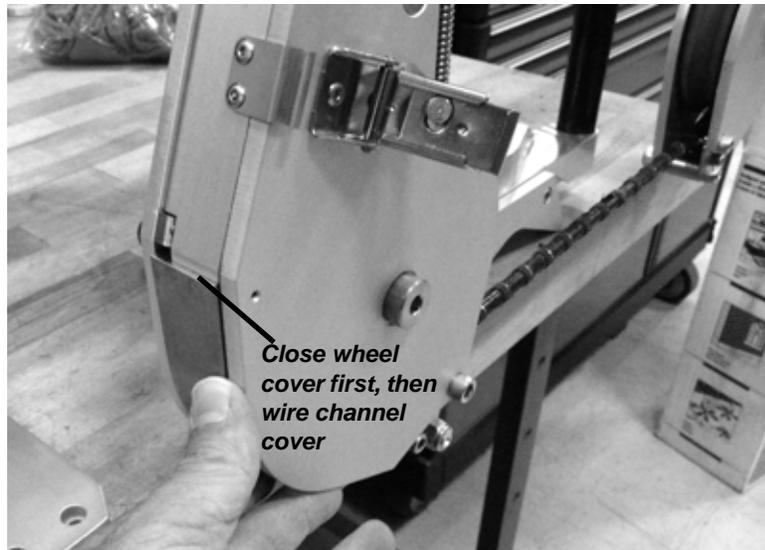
Latch the right arm assembly in the open (operating) position.
